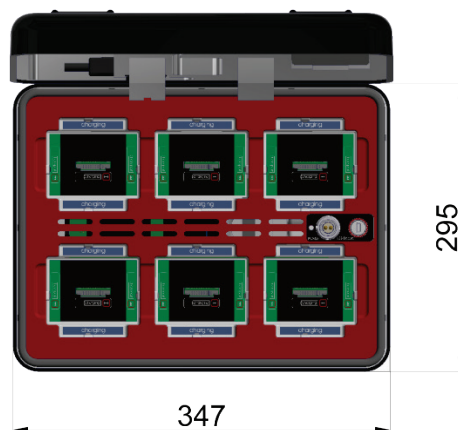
Dimensional Drawing of the Charging Station for *RIEGL* RBLI8S1P, all dimensions in mm
